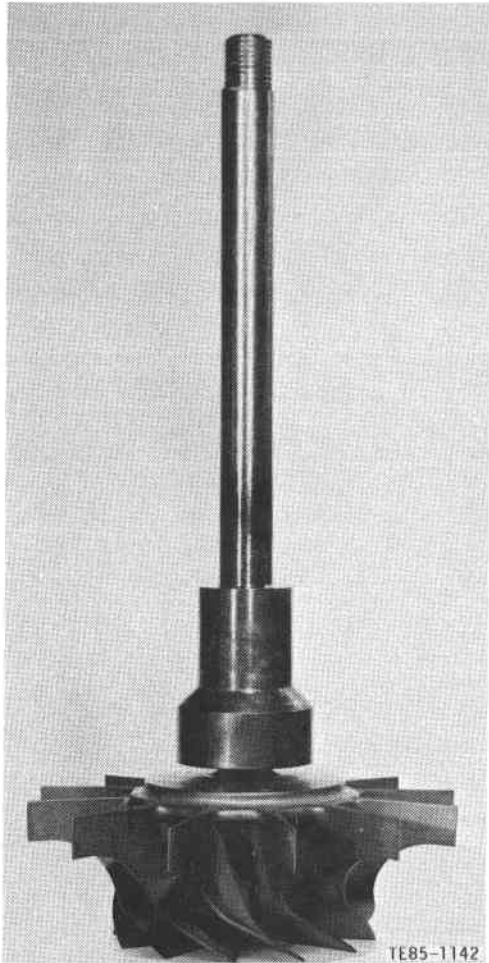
Semifinished rotor/shaft assembly 13.5 deg machined taper rotor backface and second iteration attachment design.
